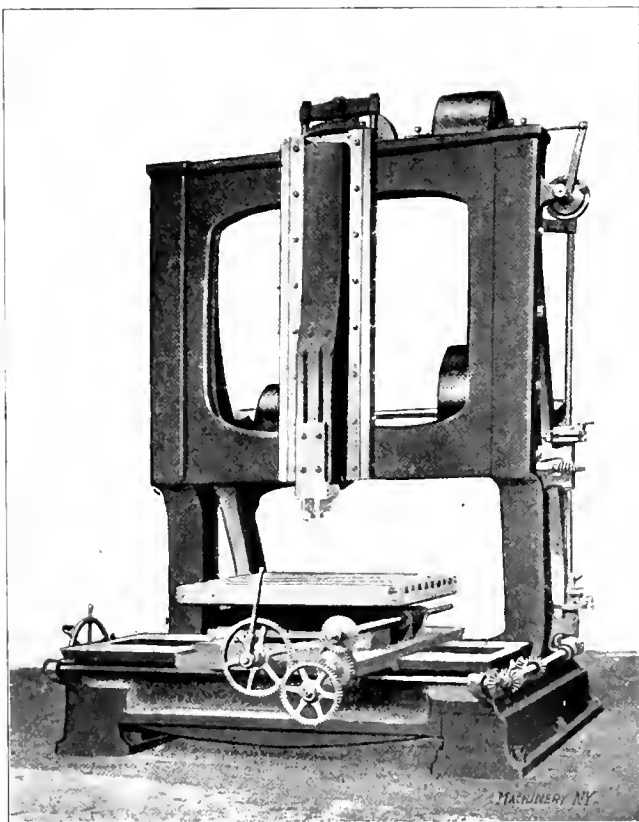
Slotting Machine. Joseph Whitworth & Co. (1874)
